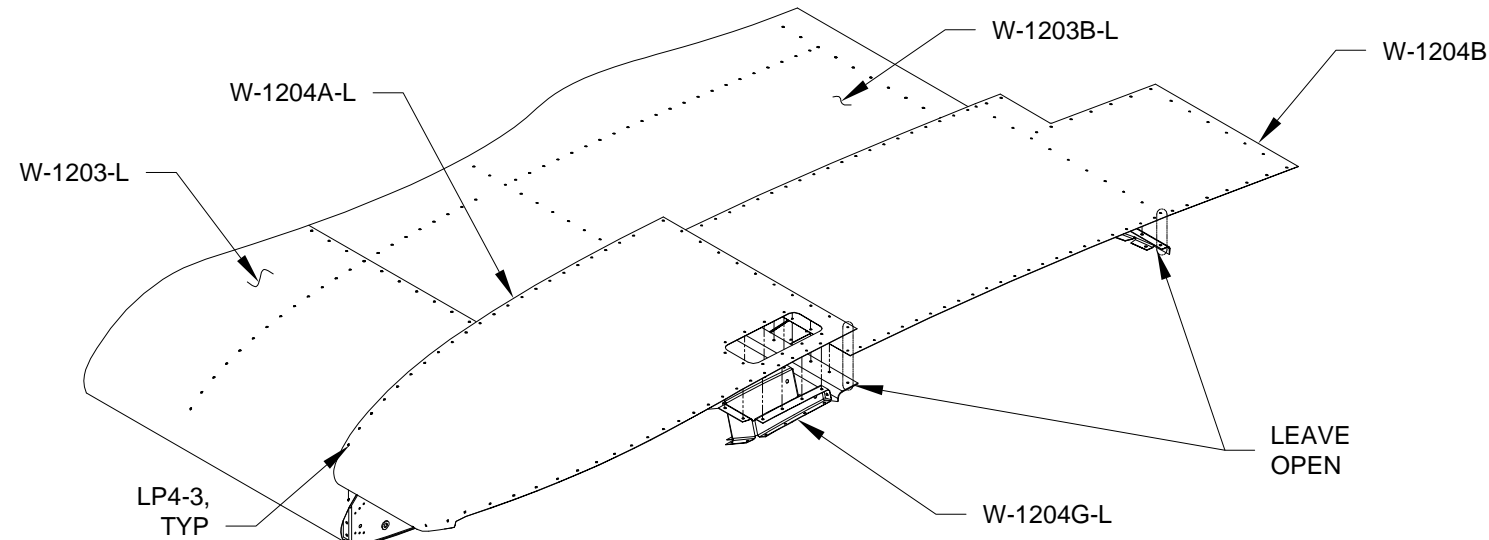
ATTACHING THE FWD WING TIP RIB
